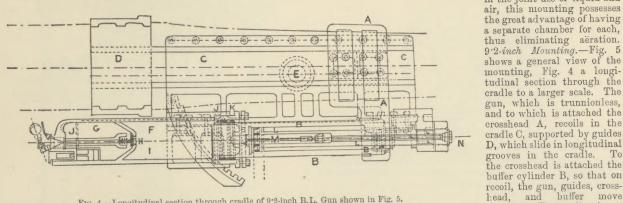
Longitudinal section through cradle of 9.2-inch B.L. Gun shown in Fig. 5.
